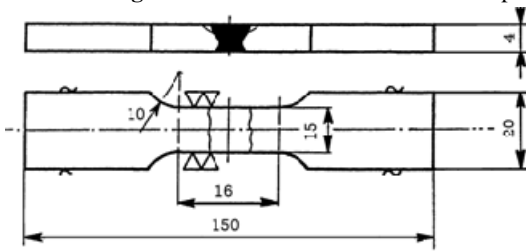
Tensile specimens used for YS and UTS measurement in butt-welded joint.
